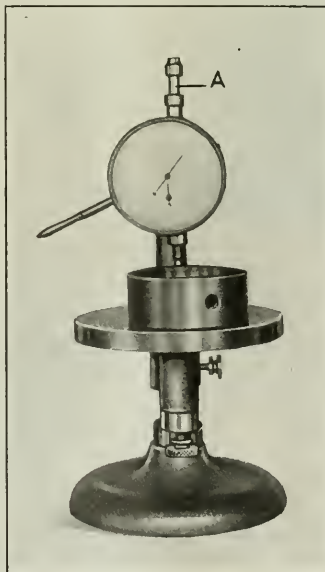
Gaging the Location of the Spindle Hole in the Dial Case
